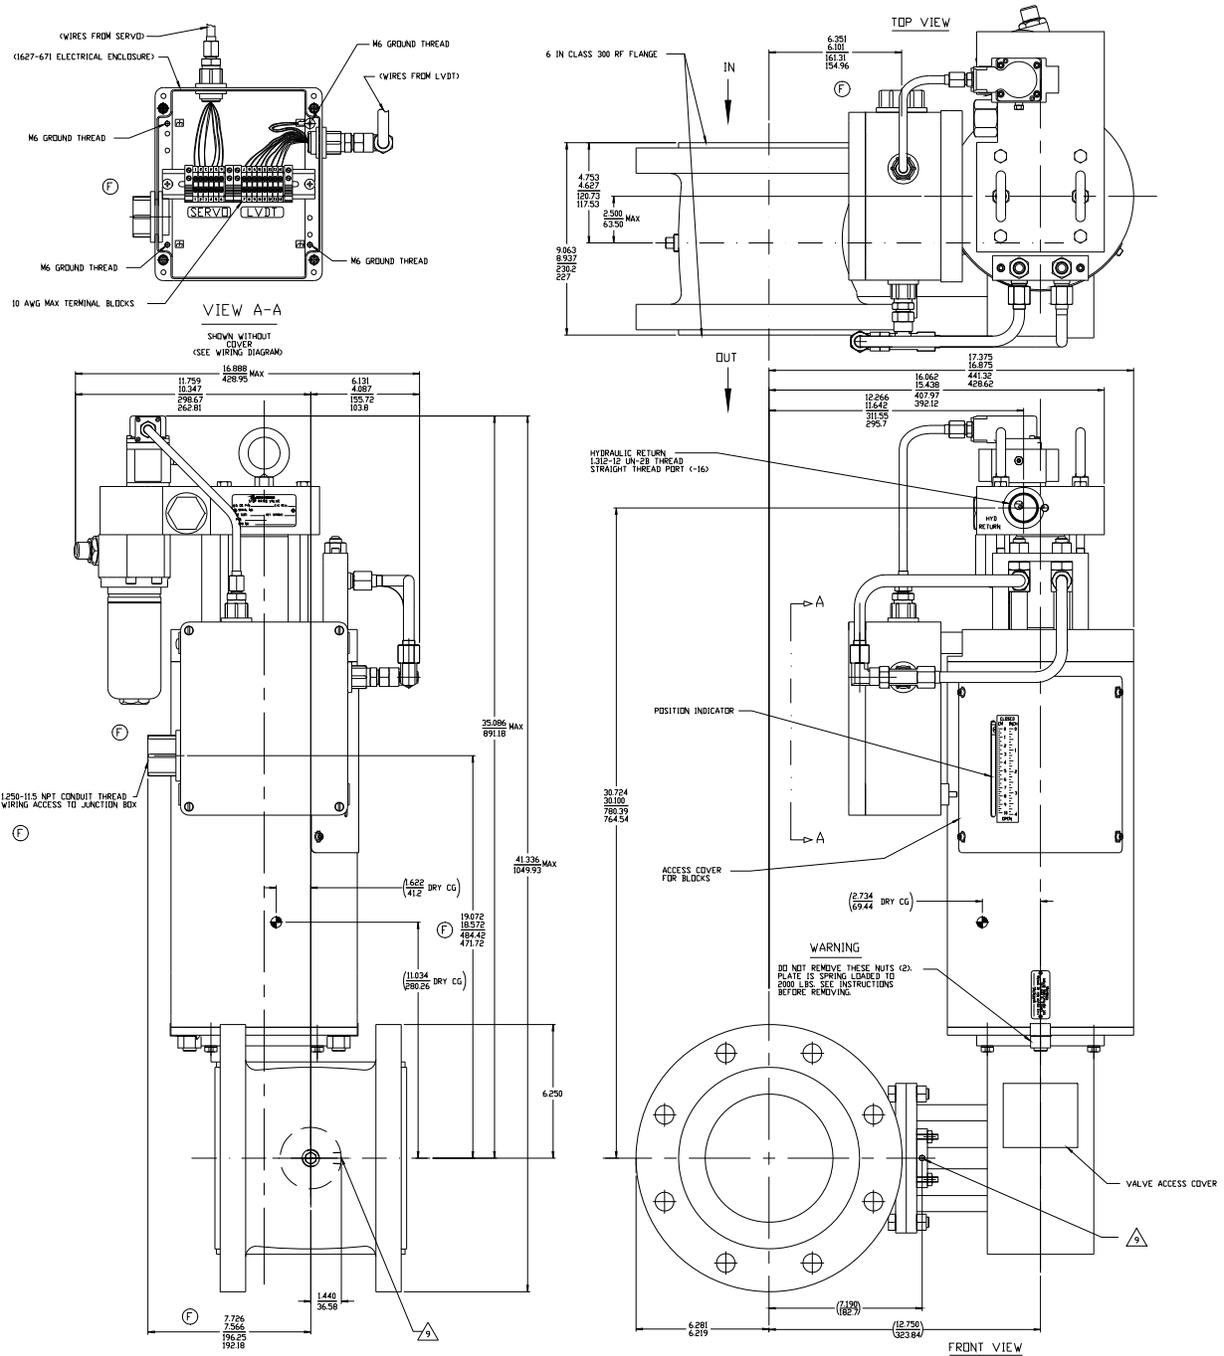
Gas Stop/Ratio Valve Outline Drawing (6-inch, except SS-260)
